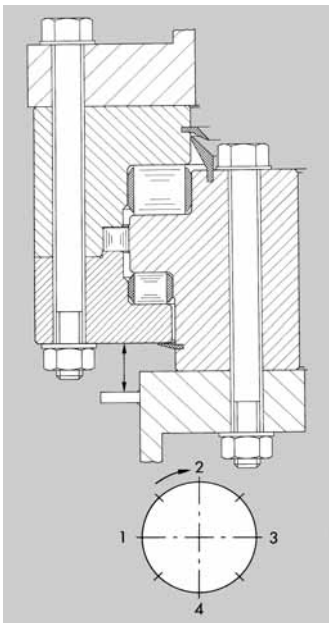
Three-row roller bearing slewing ring – basic test setup for axial reduction measurement.
